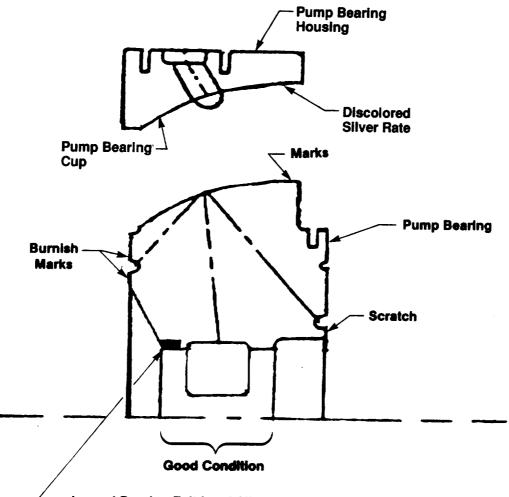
Contact Locations on Pump Bearing Assembly
